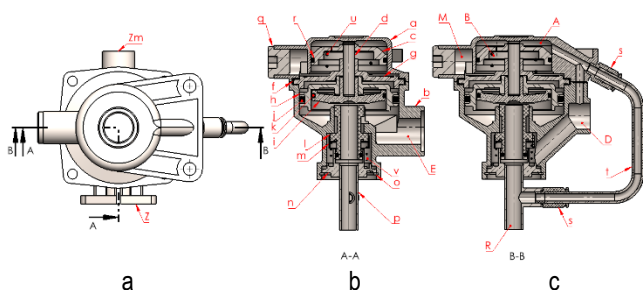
View of differential valve; a - top view; b - A-A cross-sectional view of main supply tract; b - B-B cross-sectional view of differential tract
